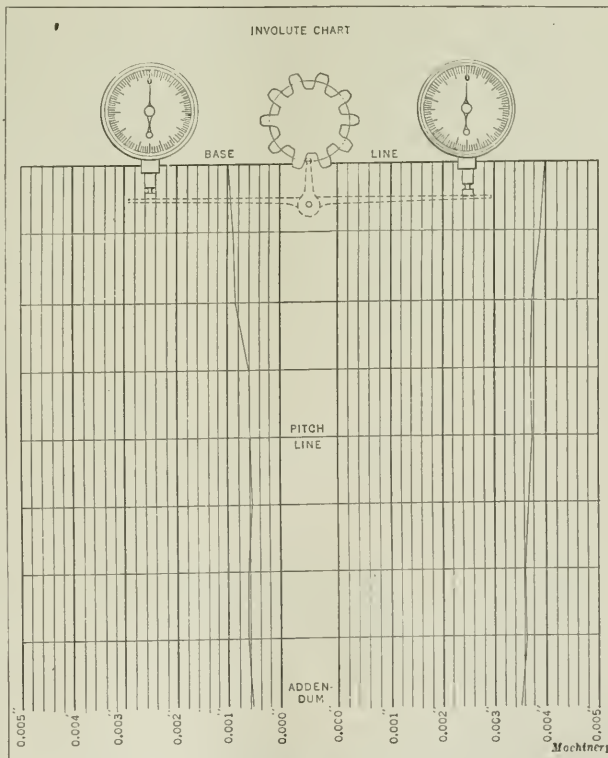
Chart for recording Results of Involute Gear Tests made on Machine shown in Figs. 4 and 5
